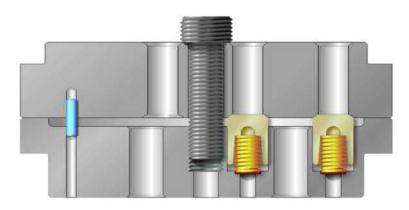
Sectional view of a dresser-rand "magnum poppet type valve.
